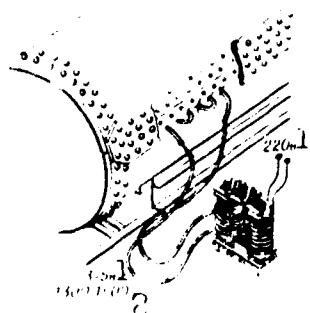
Inspection of the riveted joint of a boiler drum by magnetic particle inspection. 1) v; 2) amps.
